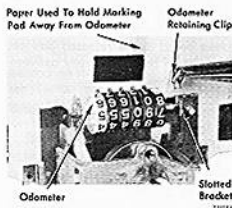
Removing or Replacing Odometer — 10 Series Shown
